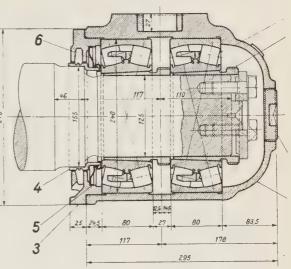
S. K. F. outside type double roller bearing box with double row of rollers fastened by split conical sleeves, grease lubricated, for wagons (Extract from W. A. 6021 drawing of the C. F. F.).
